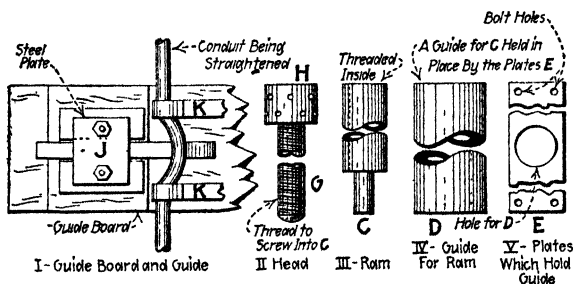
Some details of the straightener of Fig. 281. (Ram, C, is a hollow cylindrical piece of steel which is internally threaded so that piece, G, with its head, H, will turn in it.)
